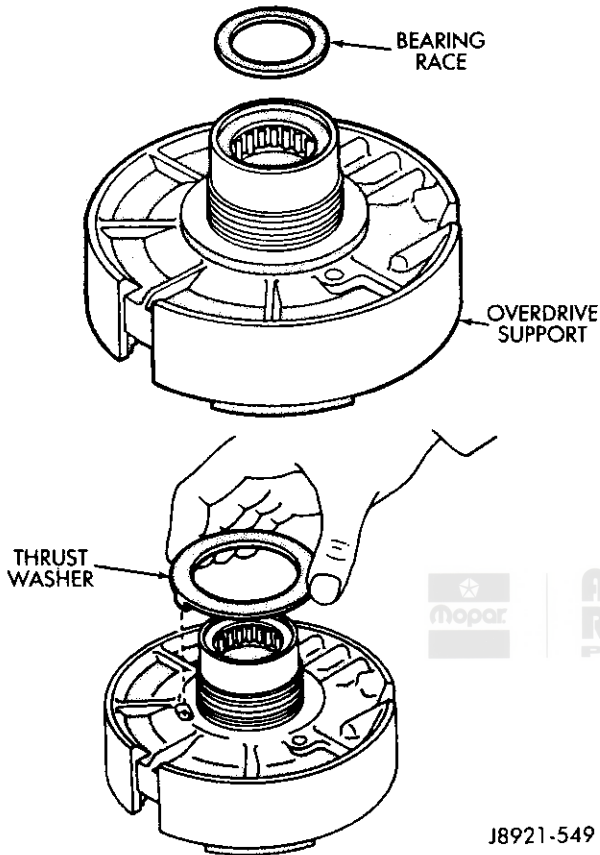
Removing Clutch Drum Thrust Washer And Race
